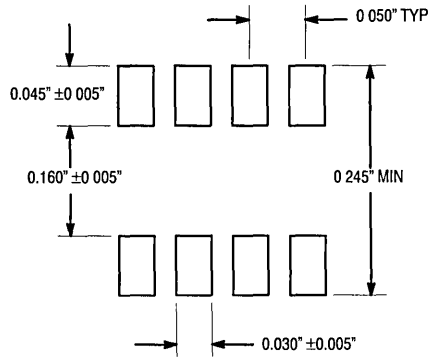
8-Lead SOIC Solder Pad Dimensions
